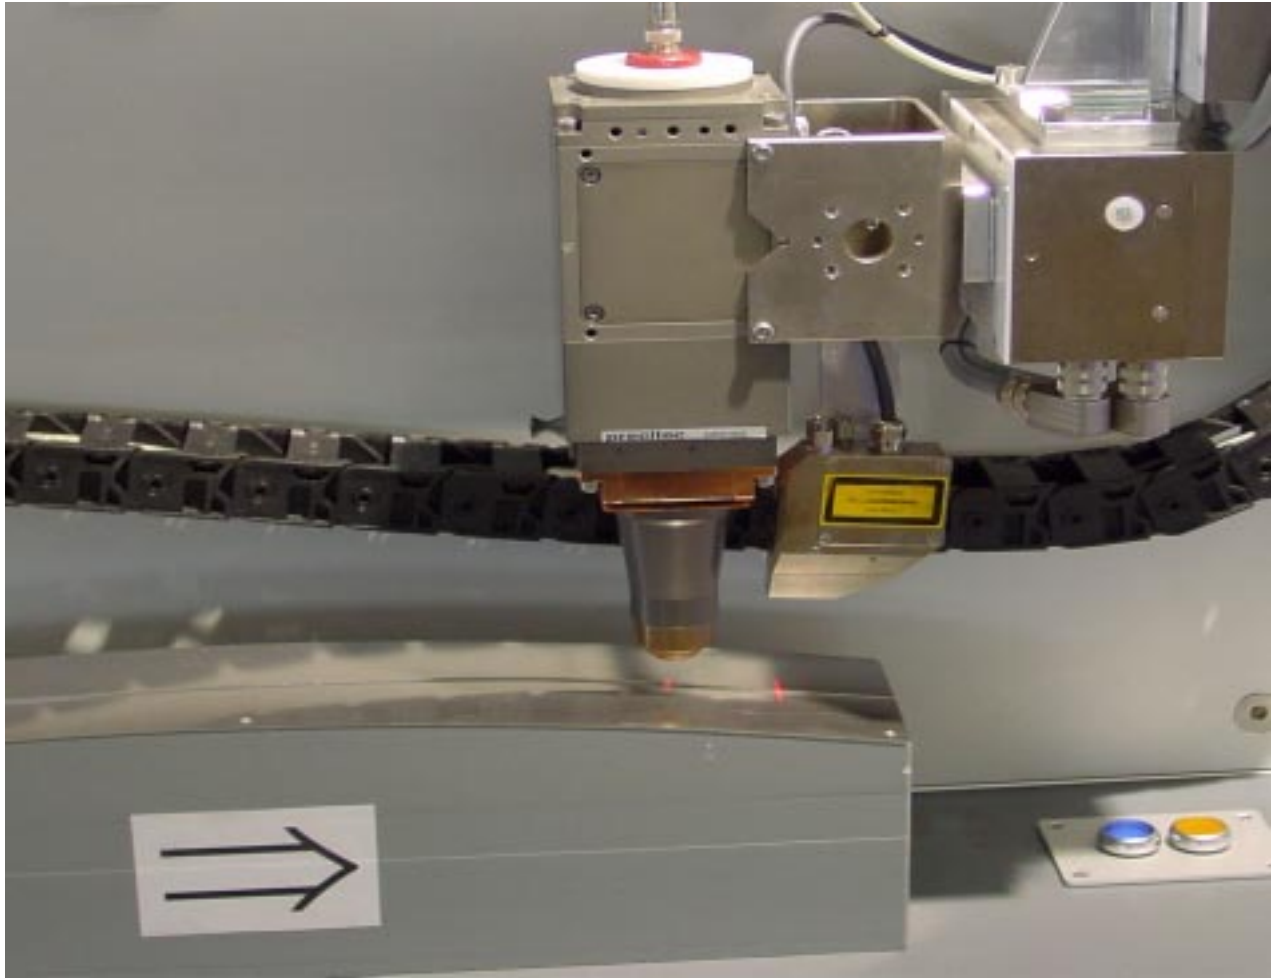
and 8 are showing typical set up of detectors using standard welding heads. To reduce the outer dimension of the welding head especially in robot guided welding Precitec KG did find a way to integrate the complete sensor set up into a new High Power welding head.
